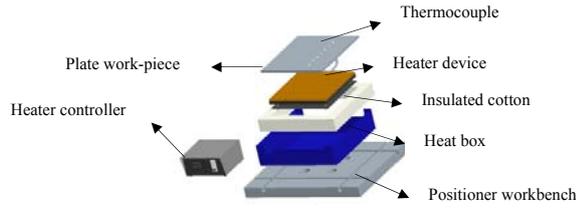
FIGURE I. EXPLODED-VIEW OF HEATING SYSTEM FOR THERMAL MACHINING
